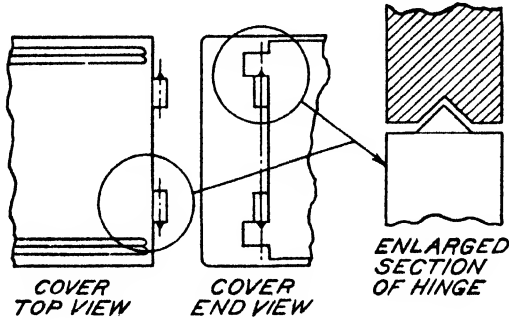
Special form of hinge involving integrally molded conical projections that mate with corresponding conical holes in the other half. Although undercuts are involved, they are shallow and the moldings can be sprung enough to free them from the mold and to assemble them subsequently.
